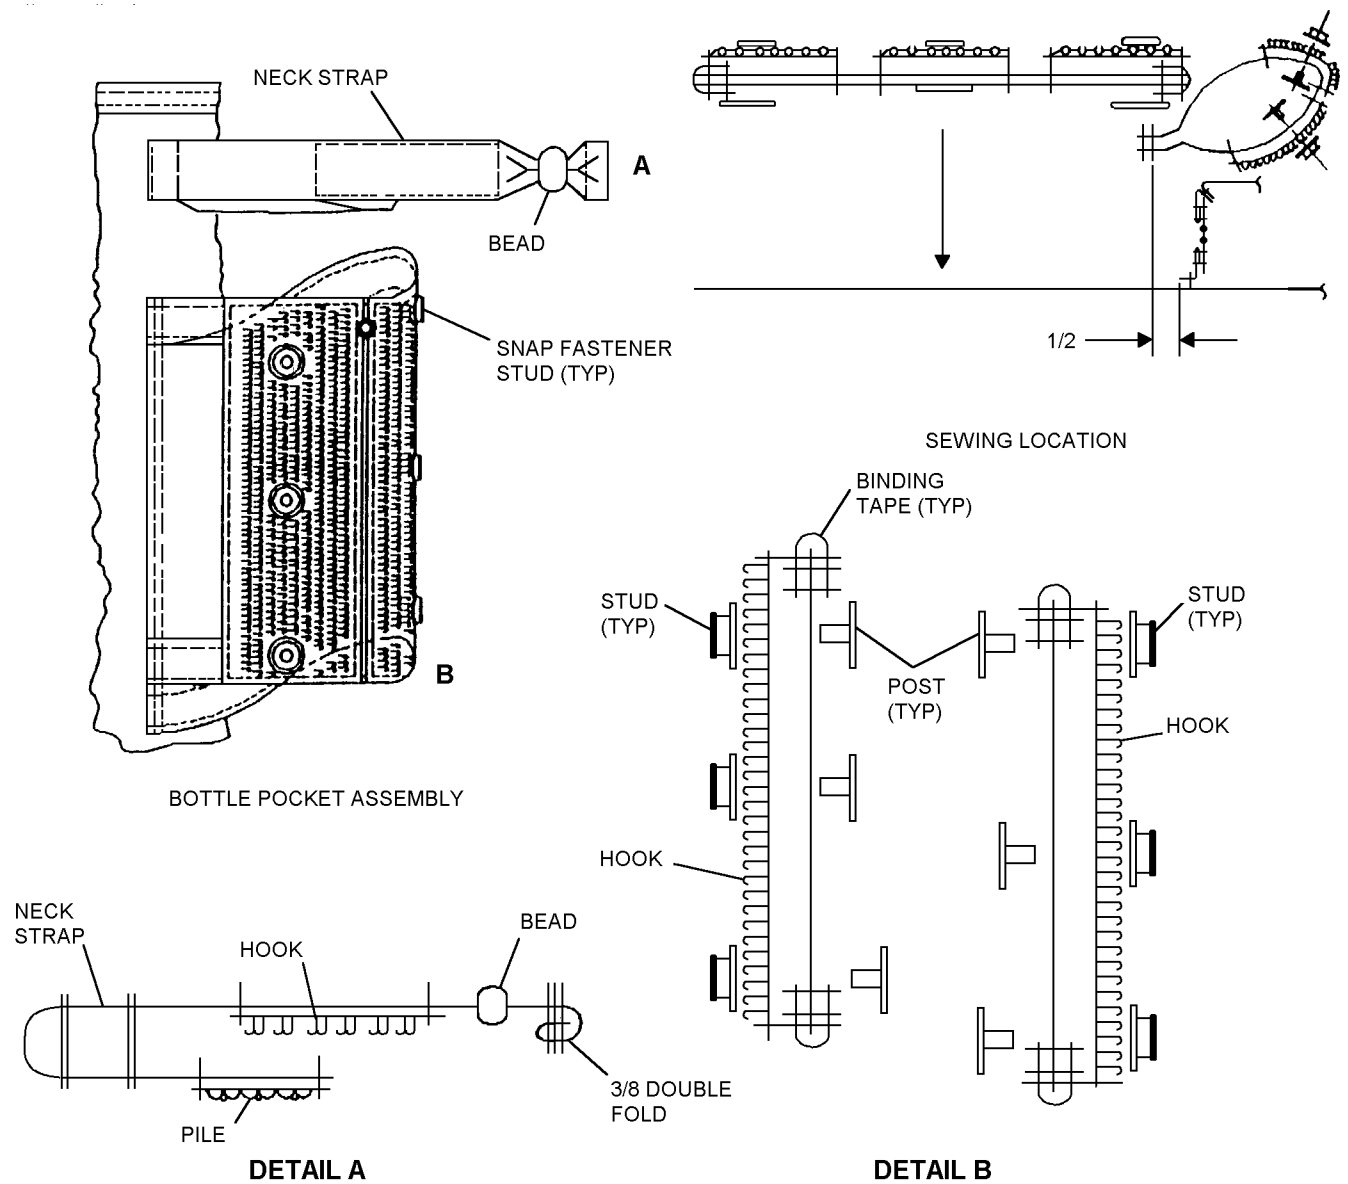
Fabrication of SRU-40/P HABD Bottle Pocket Assembly
